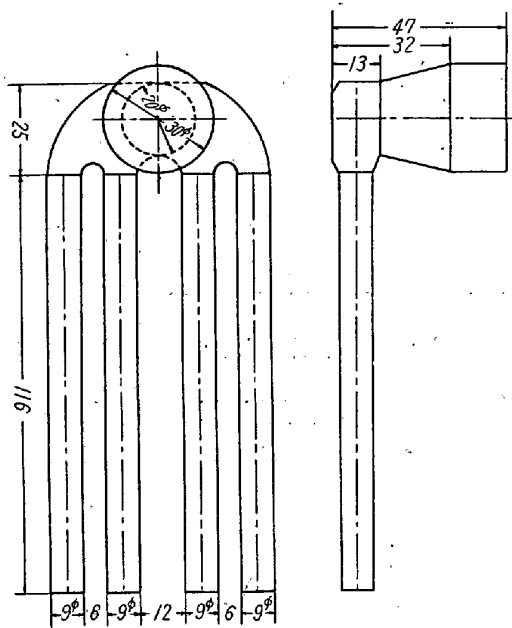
Dimensions of the specimen used in the experiment of annealing.
